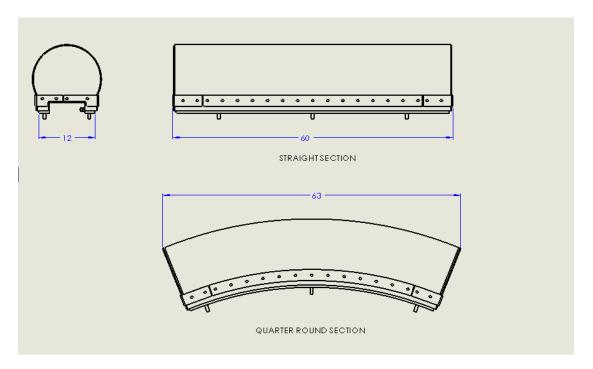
Primary Seal Bladder Segment - Fabrication Dimensions
